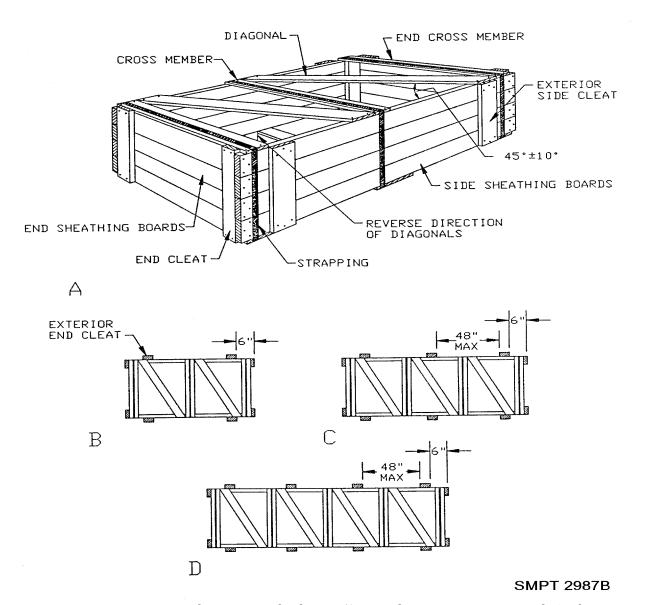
Type II, crate with exterior side cleats. (A- complete crate, B- two panel, C- three panel, and D- four panel.
